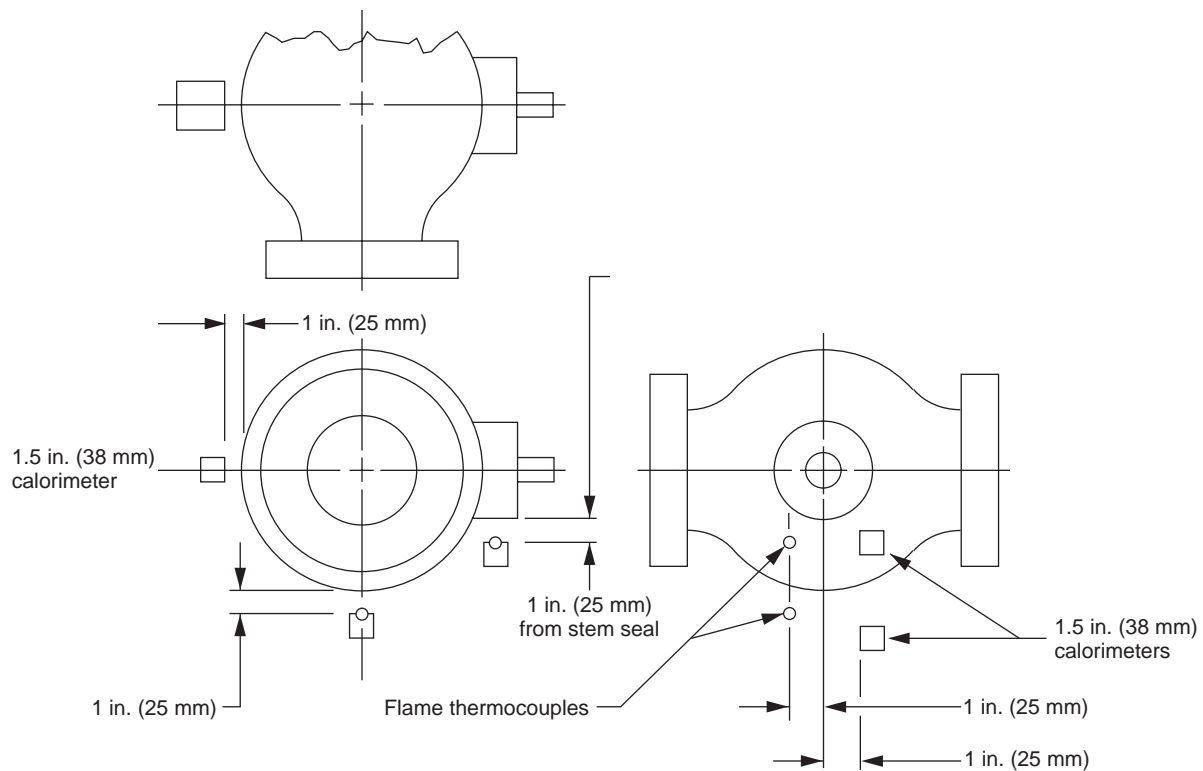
Location of Calorimeters Larger Valves (References 2.2)
